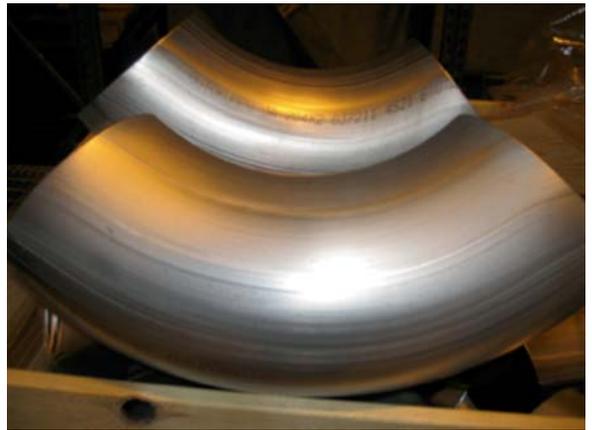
Laser weld ferritic stainless steel tubular products (by courtesy of OSTP Finland Oy)
